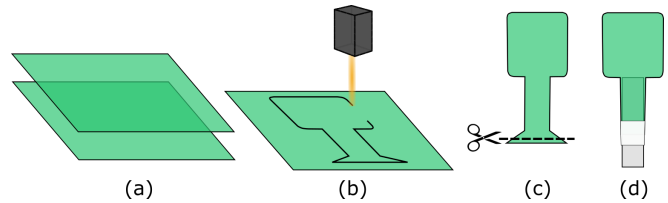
Fabrication process for the individual pouches consists of (a) heat pressing two layers of TPU, (b) laser welding the 2-D shape, (c) cutting an opening for the pneumatic tubing, (d) inserting and sealing the tubing in place.
